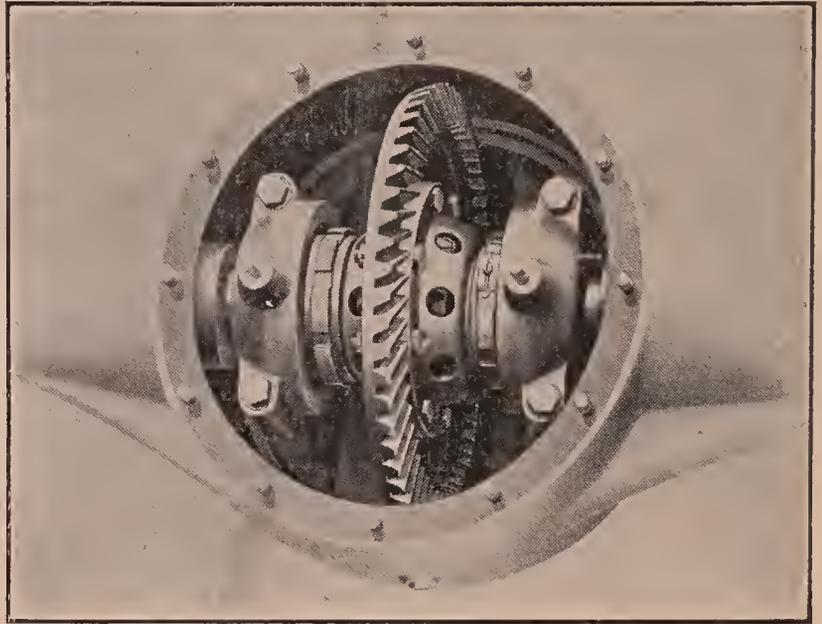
Worm or Skew Bevel Gears, Used on 1914 Packard Cars, Supposed to Have the Advantages of Both Worm and Bevel Forms.
